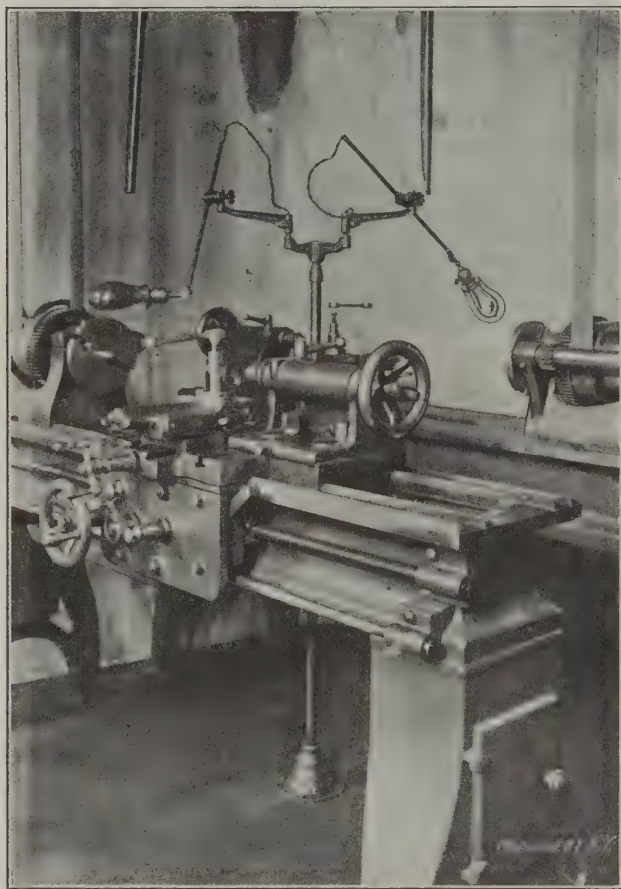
Engine Lathe with Electric Light Holder in Rear.
